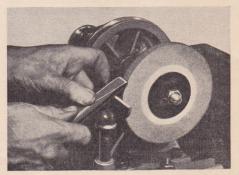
Sharpening chisel on lathe fitted with ATKINS Acrolite Grinding Wheel
